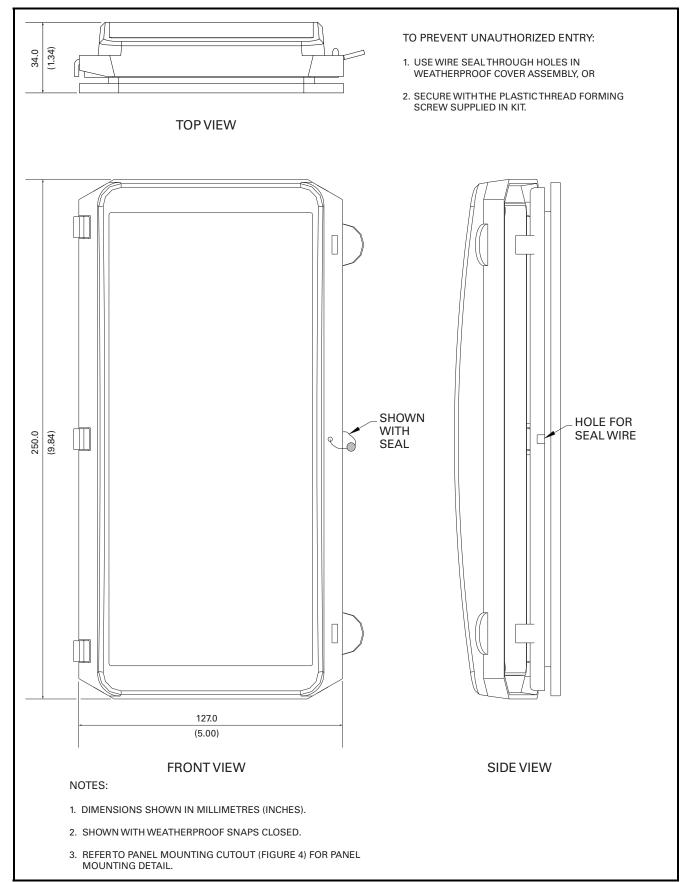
SE-IP65CVR-G Weatherproof Cover Outline.
